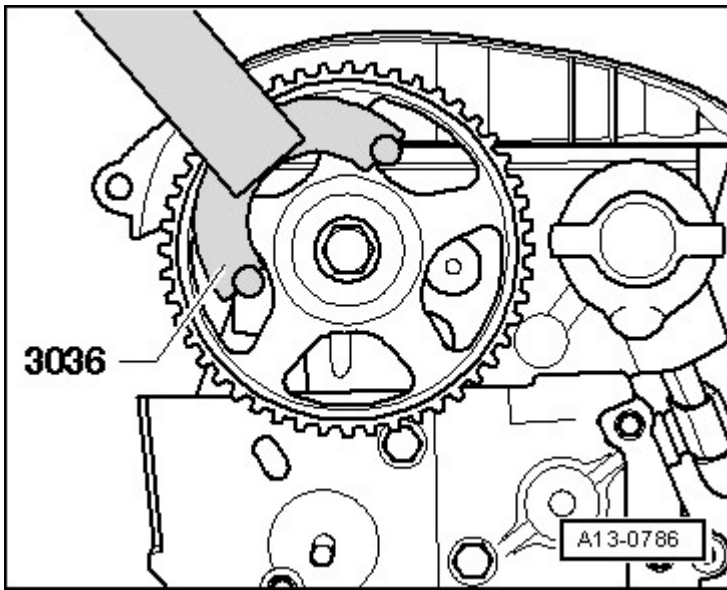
Loosening Bolt For Camshaft Sprocket Using Retainer 3036
